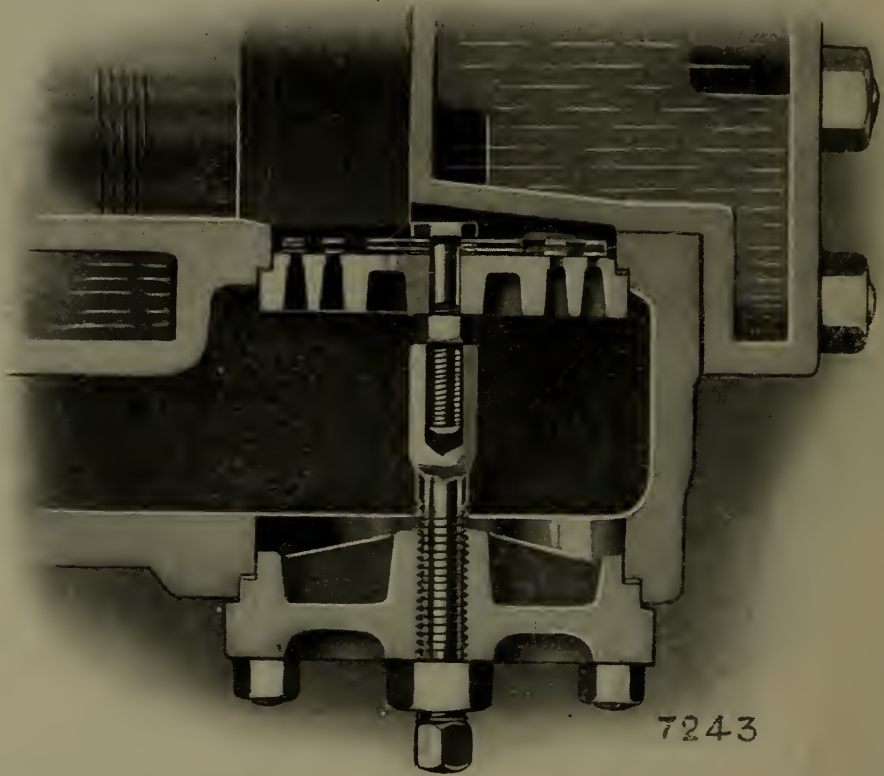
A section of an air cylinder of the straight-line type, equipped with the plate valve.
